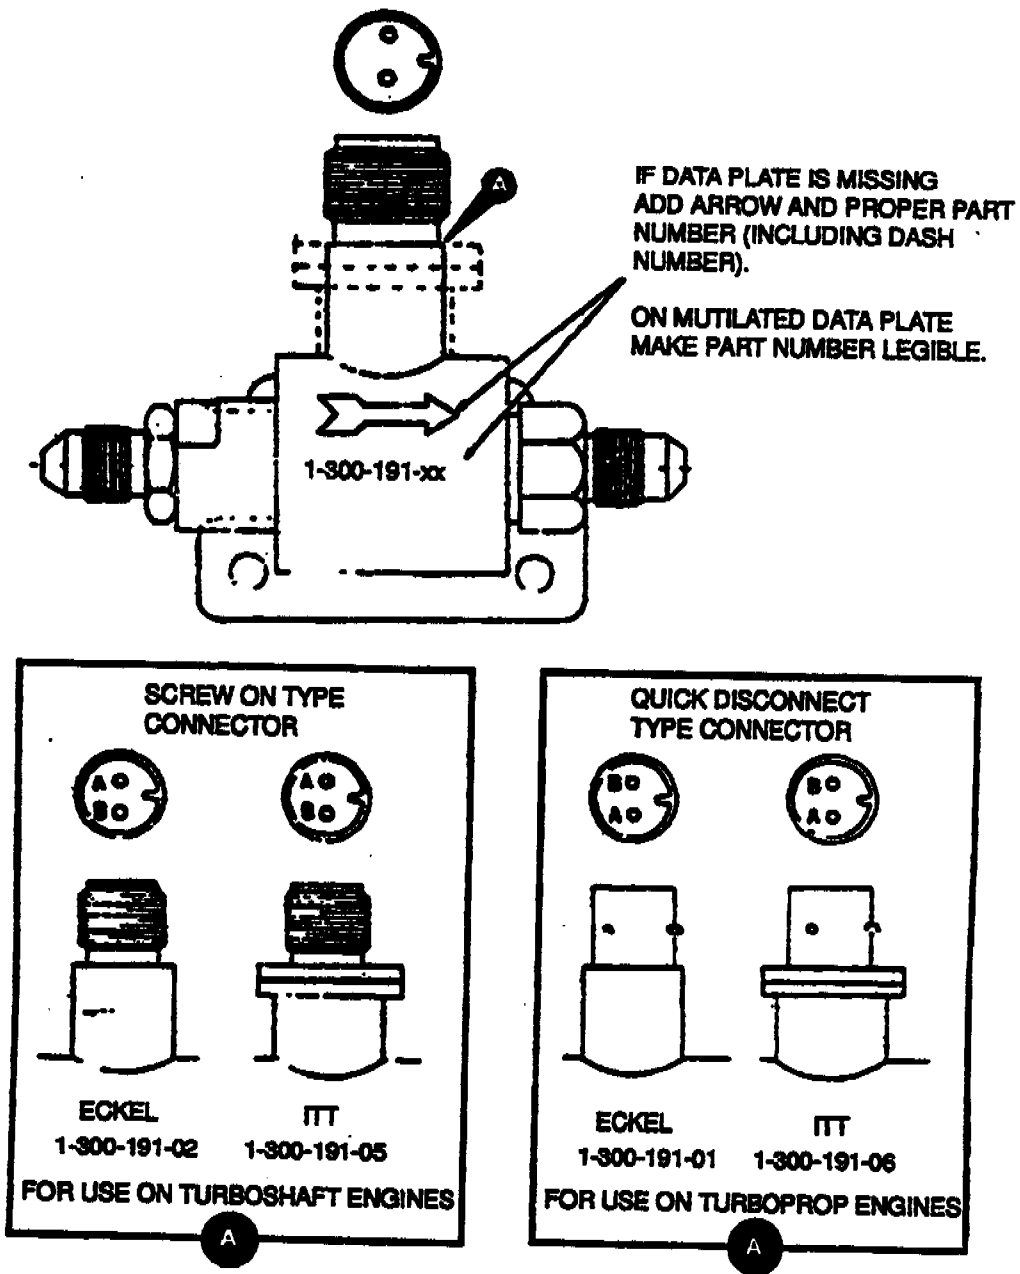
Identification of Starting Fuel Solenoid Valve.
